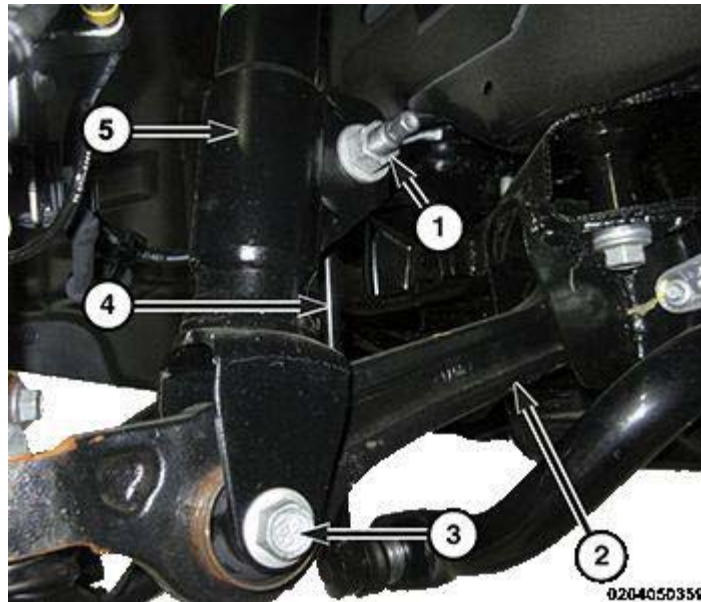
Stabilizer Link To Strut Nut, Lower Control Arm, Lower Control Arm Bolt, Stabilizer Link & Shock/Strut Assembly
